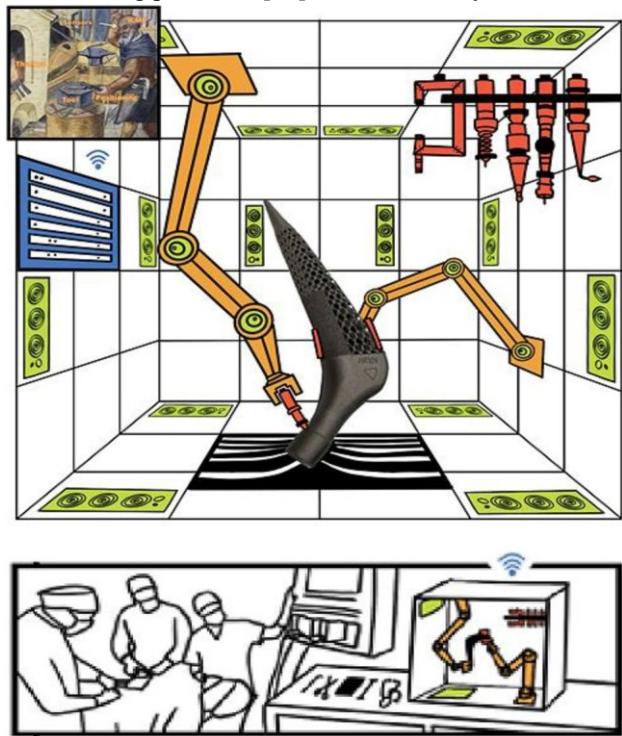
Hybrid Autonomous Manufacturing (HAM): POCM of a hip implant via robotic machining with sensors (upper). Schematic of POCM HAM robots near OR (lower)
